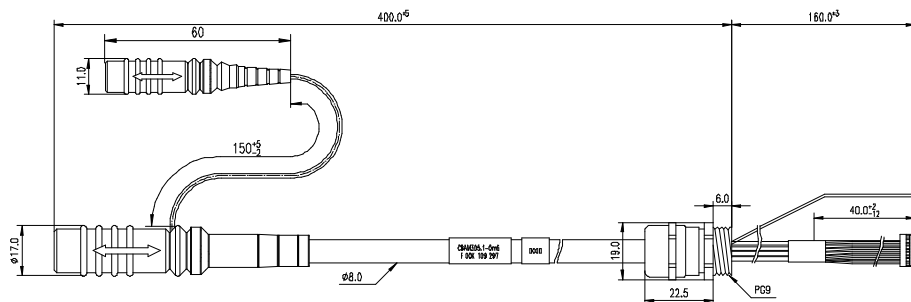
CBAM305.1-0m6 Cable - Dimensions
